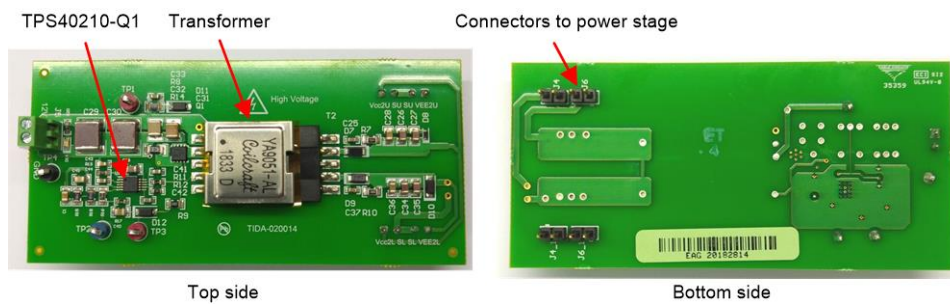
shows the PCB board image of buck with push-pull power supply from top side and bottom side, respectively.
